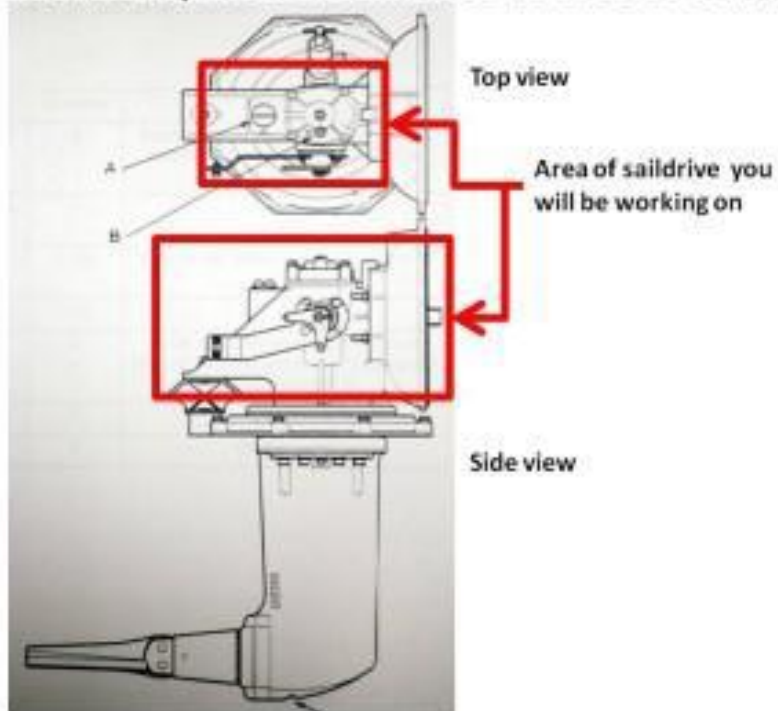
shows the side and top view of the saildrive and highlights the area of the saildrive you will be working on.
